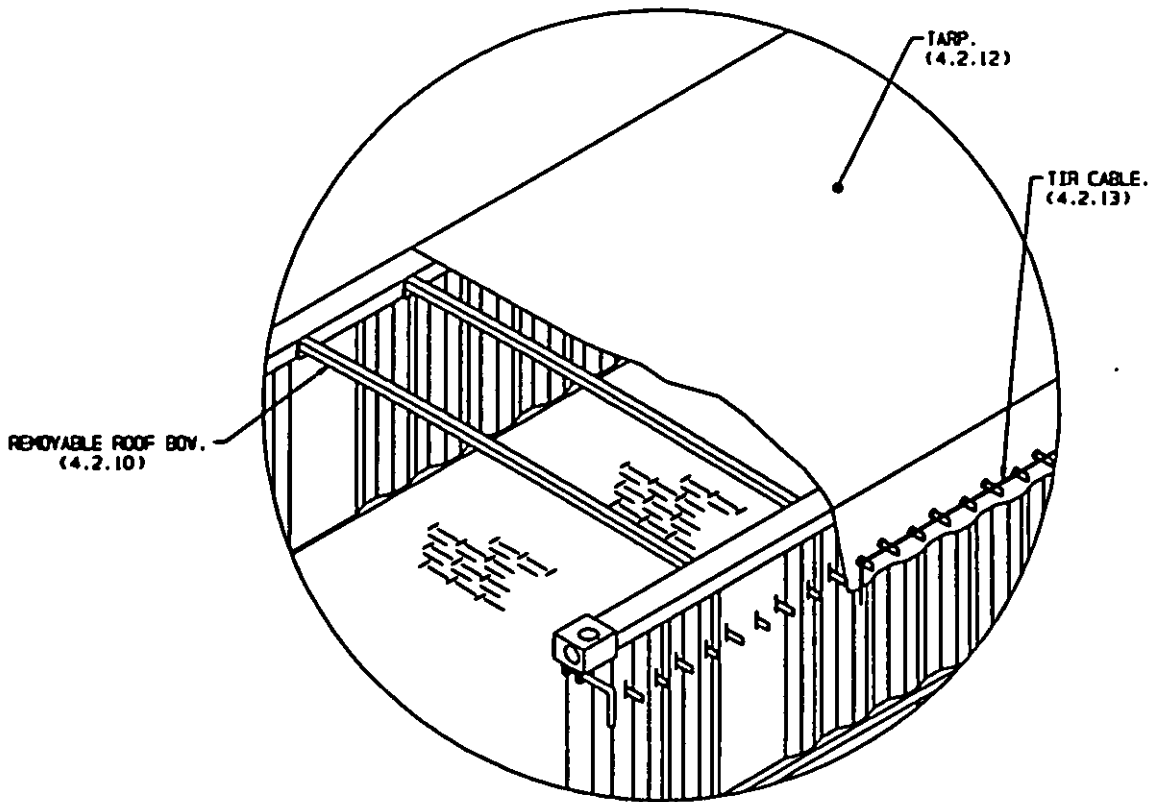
D - REMOVABLE COVER (TARP) ASSEMBLY
